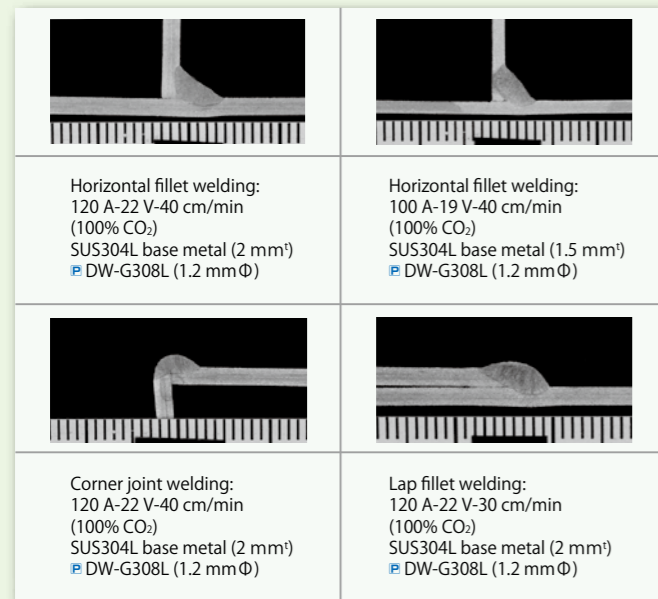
Application of sheet metal welding by DW-G308L (1.2 mm φ)
